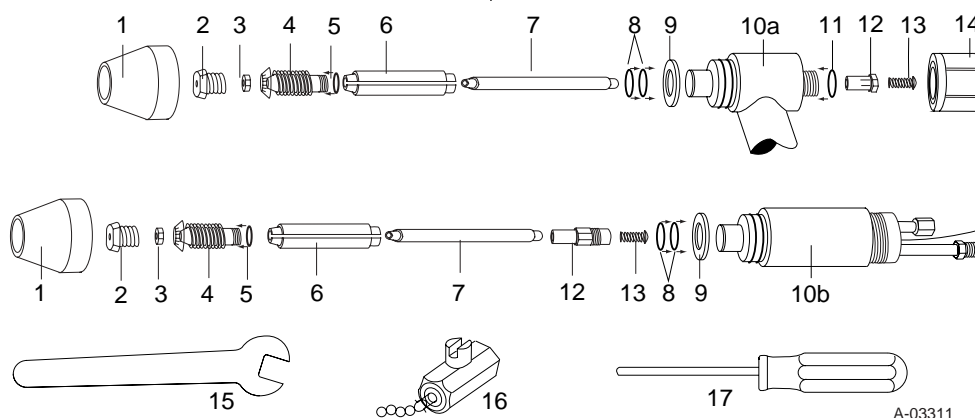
A Plasma Cutting Torch (PCH/M-4B), Exploded View
